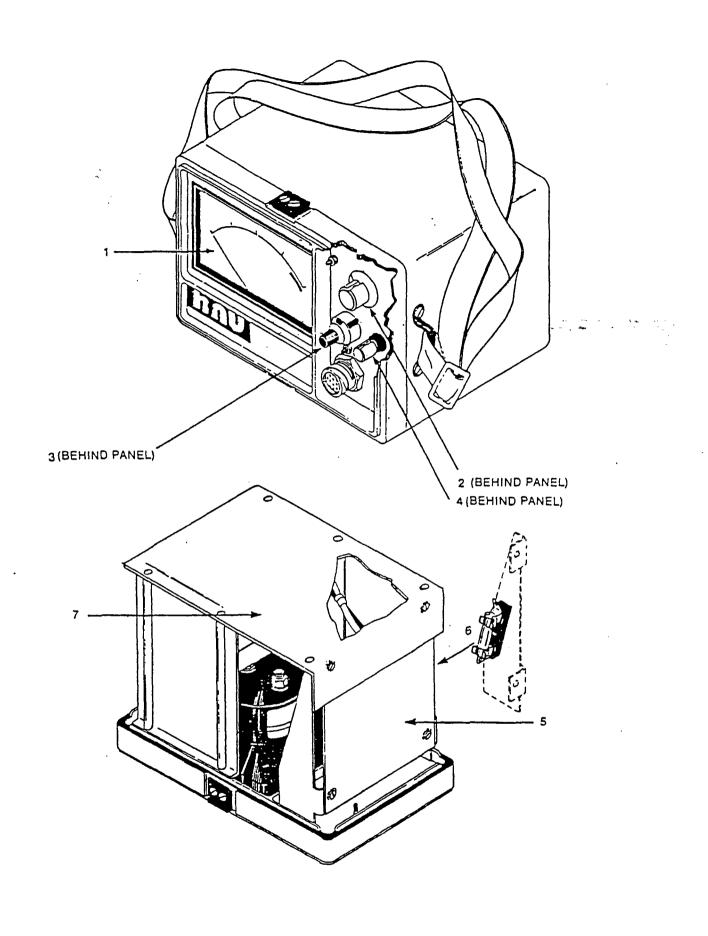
PARTS LOCATION, READOUT ASSEMBLY
